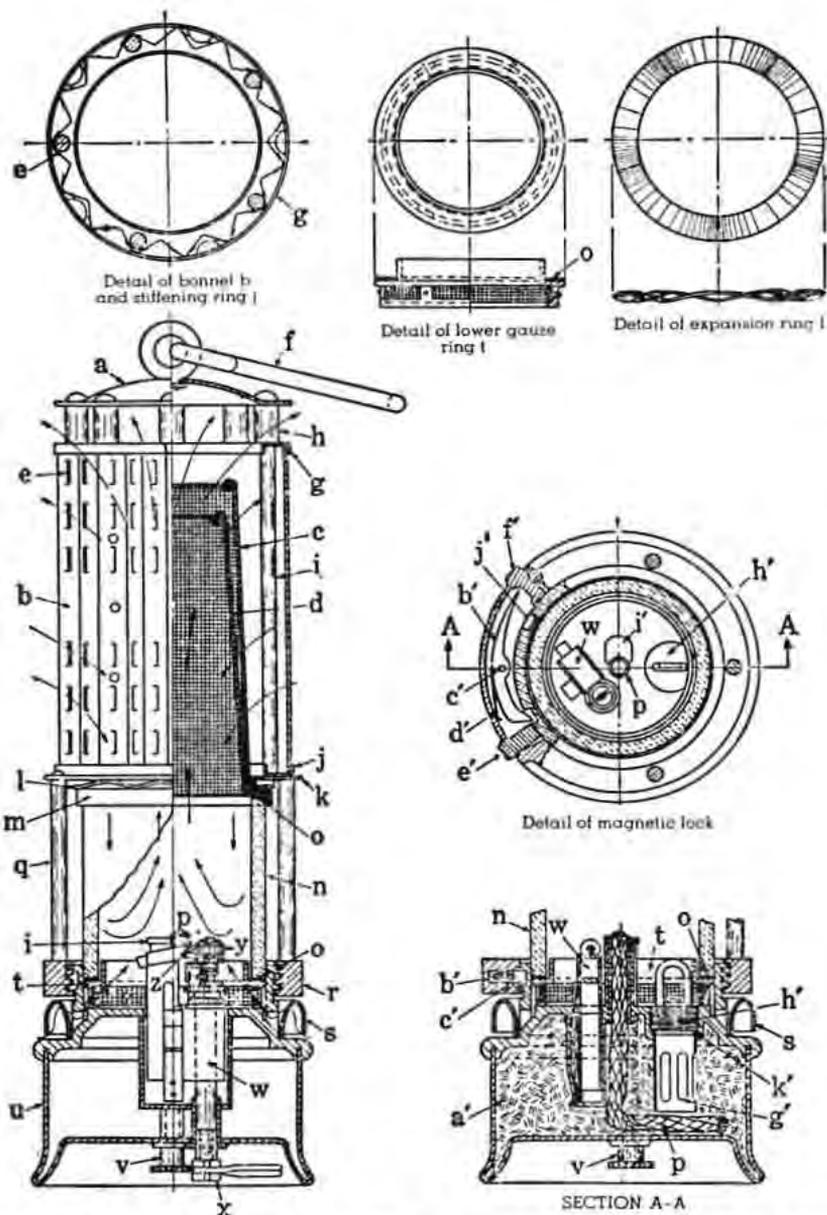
Details of Wolf lamp: a, Hood; b, bonnet; c, outer gauze; d, inner gauze; e, louvers; f, ball; g, stiffening ring; h, spacer sleeves; i, assembly rods; j, lower stiffening ring; k, middle ring; l, expansion ring; m, gauze ring; n, lamp glass; o, asbestos gaskets; p, wick; q, guard rods; r, bottom or lock ring; s, baffle ring; t, lower-gauze ring; u, fuel fount; v, wick adjuster; w, relighter; x, relighter handle; y, friction or file wheel; z, cerium spark pin; a', absorbent cotton; b', lock dog; c', lock-dog pivot; d', lock spring; e' and f', magnet contacts; g', cotton spreader; h', filling plug; i', adjustment-screw cap; j', lock recesses; k', filling-plug gasket.
